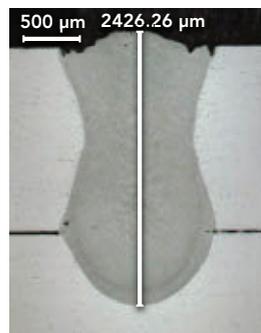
This cross-section of a weld in stack of two 1.6-mm-thick 5000 Series aluminum parts shows deep penetration with no pores or spatter.
